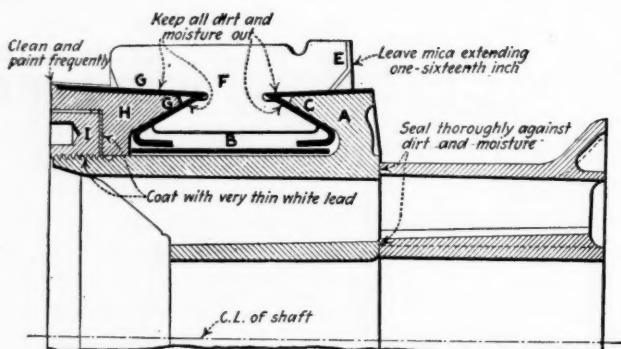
SECTION OF COMMUTATOR WITH PARTS ASSEMBLED
